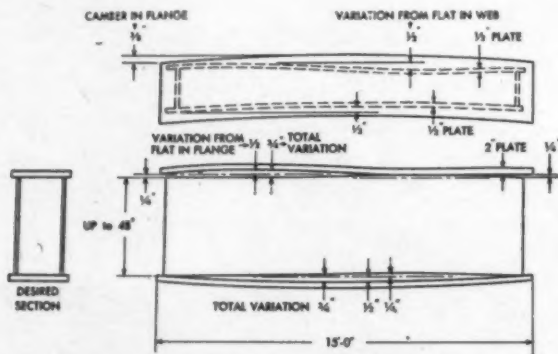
Box beam showing camber and flatness tolerance.
